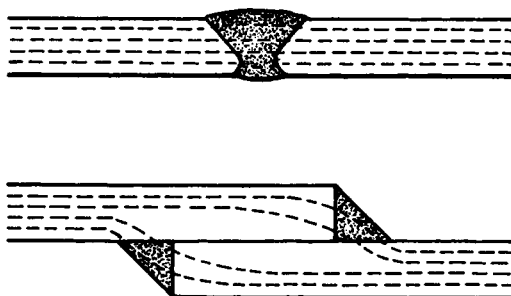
Lines of stress flow in a butt weld and lap welds.
